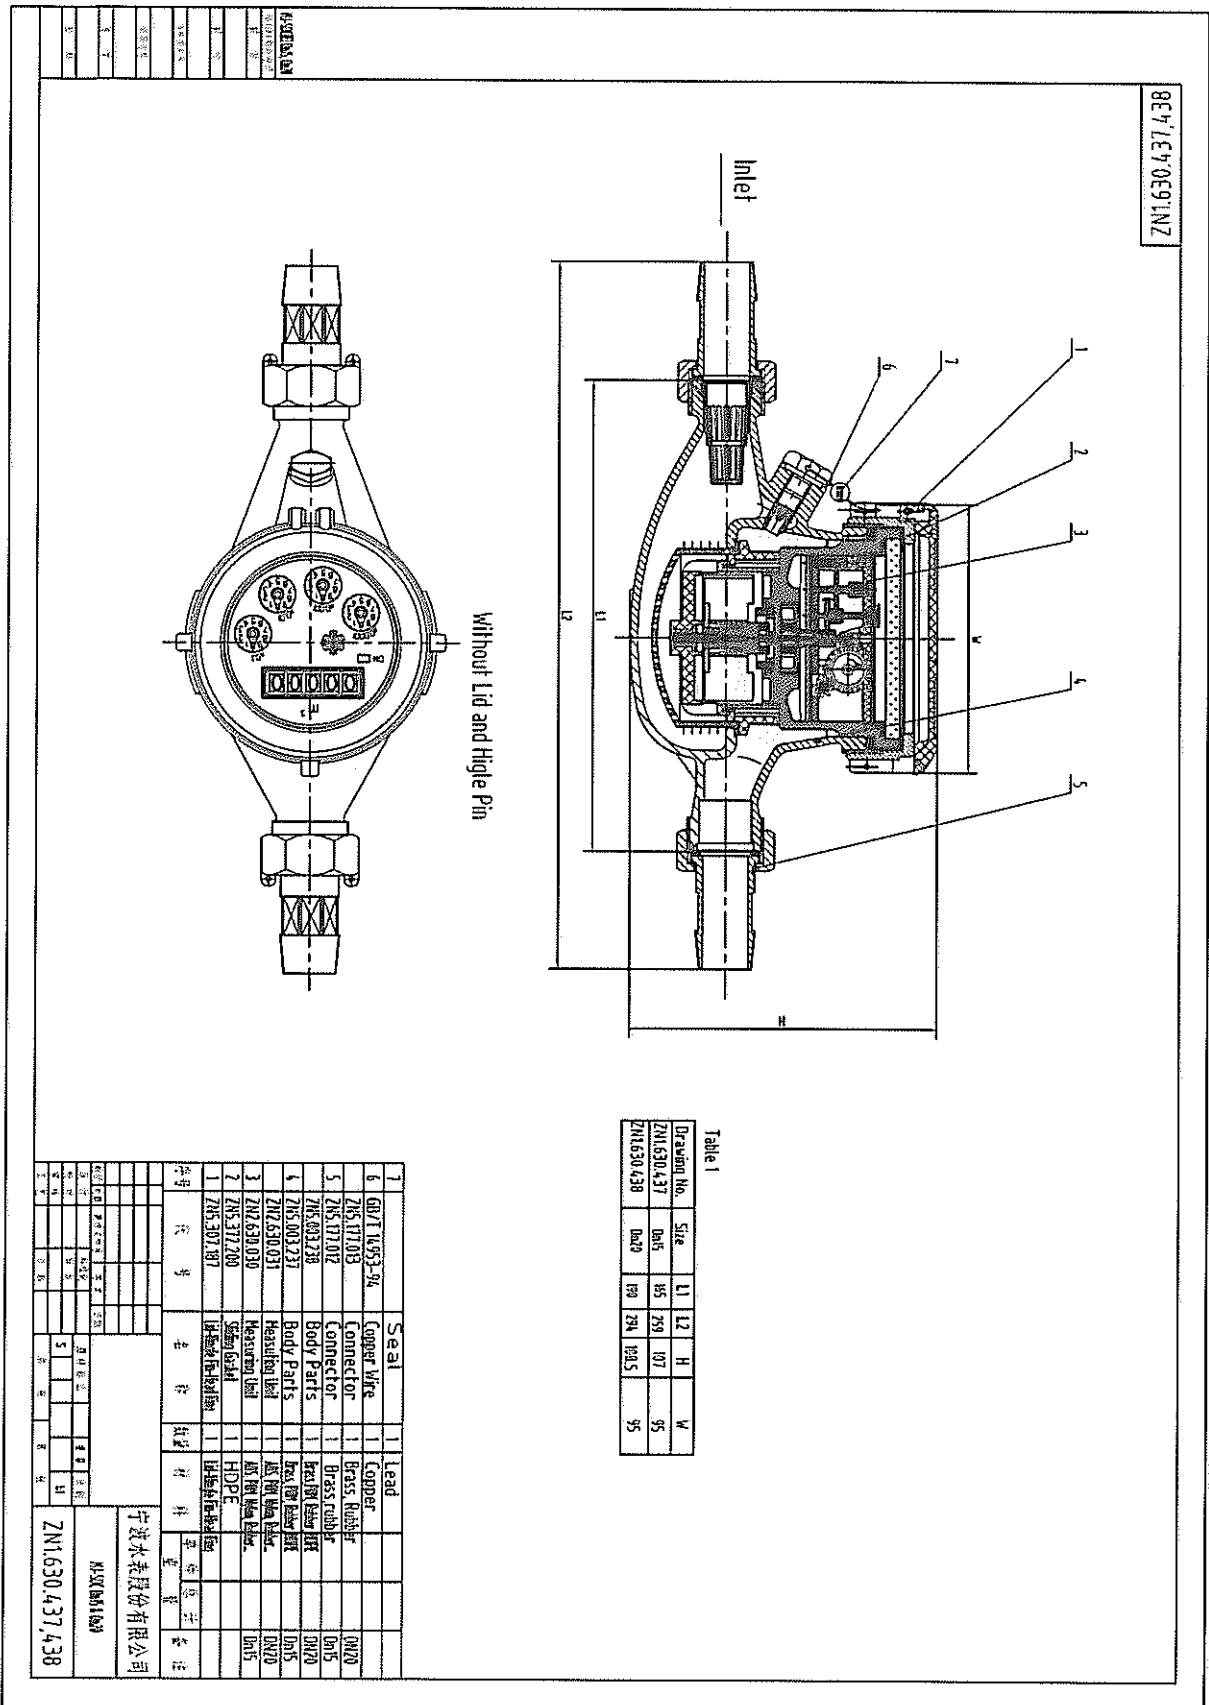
The water meter type MJ-SDC (E5) assembly drawings:
